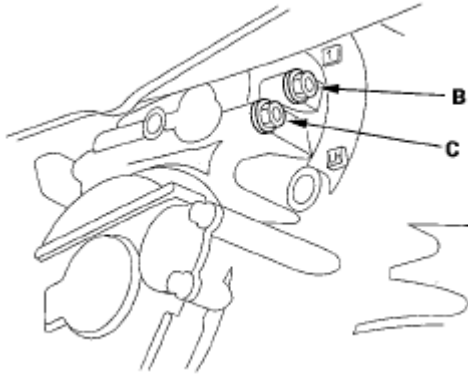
Identifying 1st Clutch Pressure Inspection Port And 1st-Hold Clutch Pressure Inspection Port
